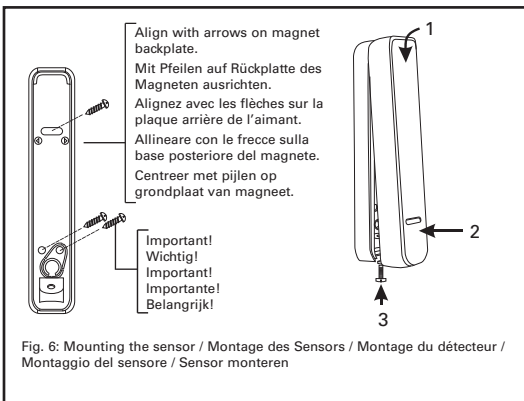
Mounting the sensor / Montage des Sensors / Montage du détecteur / Montaggio del sensore / Sensor monteren
